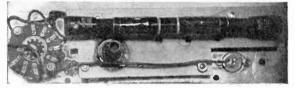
(above): Drilling details of the front panel. Fig. 3 (below): Suggested method of mounting the ferrite coils.
